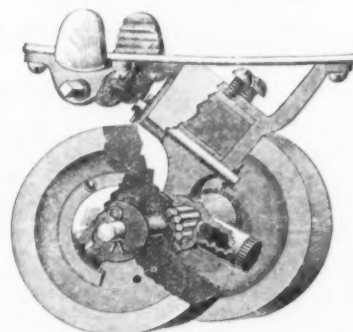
Sectional View, Showing Anti-Friction Bearing.
